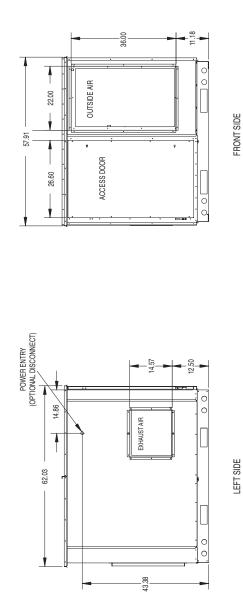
62MB,MC170-285 Indoor Unit Dimensions
